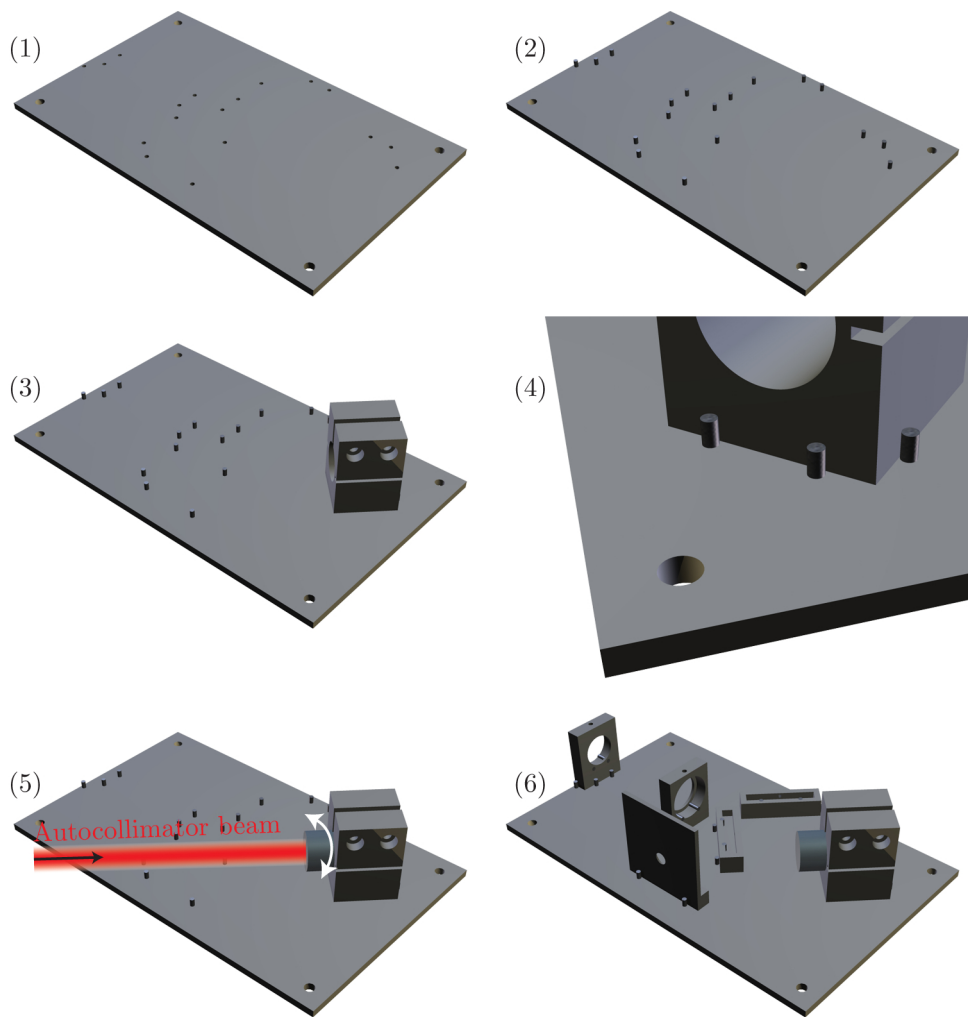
Assembly steps of OBA. (1) Holes are drilled into baseplate. (2) Steel bolts are inserted into the drill holes. (3) The steering mirror mount is placed to the three steel bolts which define its position and orientation and then glued. (4) Close-up of (3). (5) The steering mirror is mounted and aligned to the baseplate with an autocollimator. (6) All other components are placed and glued.
